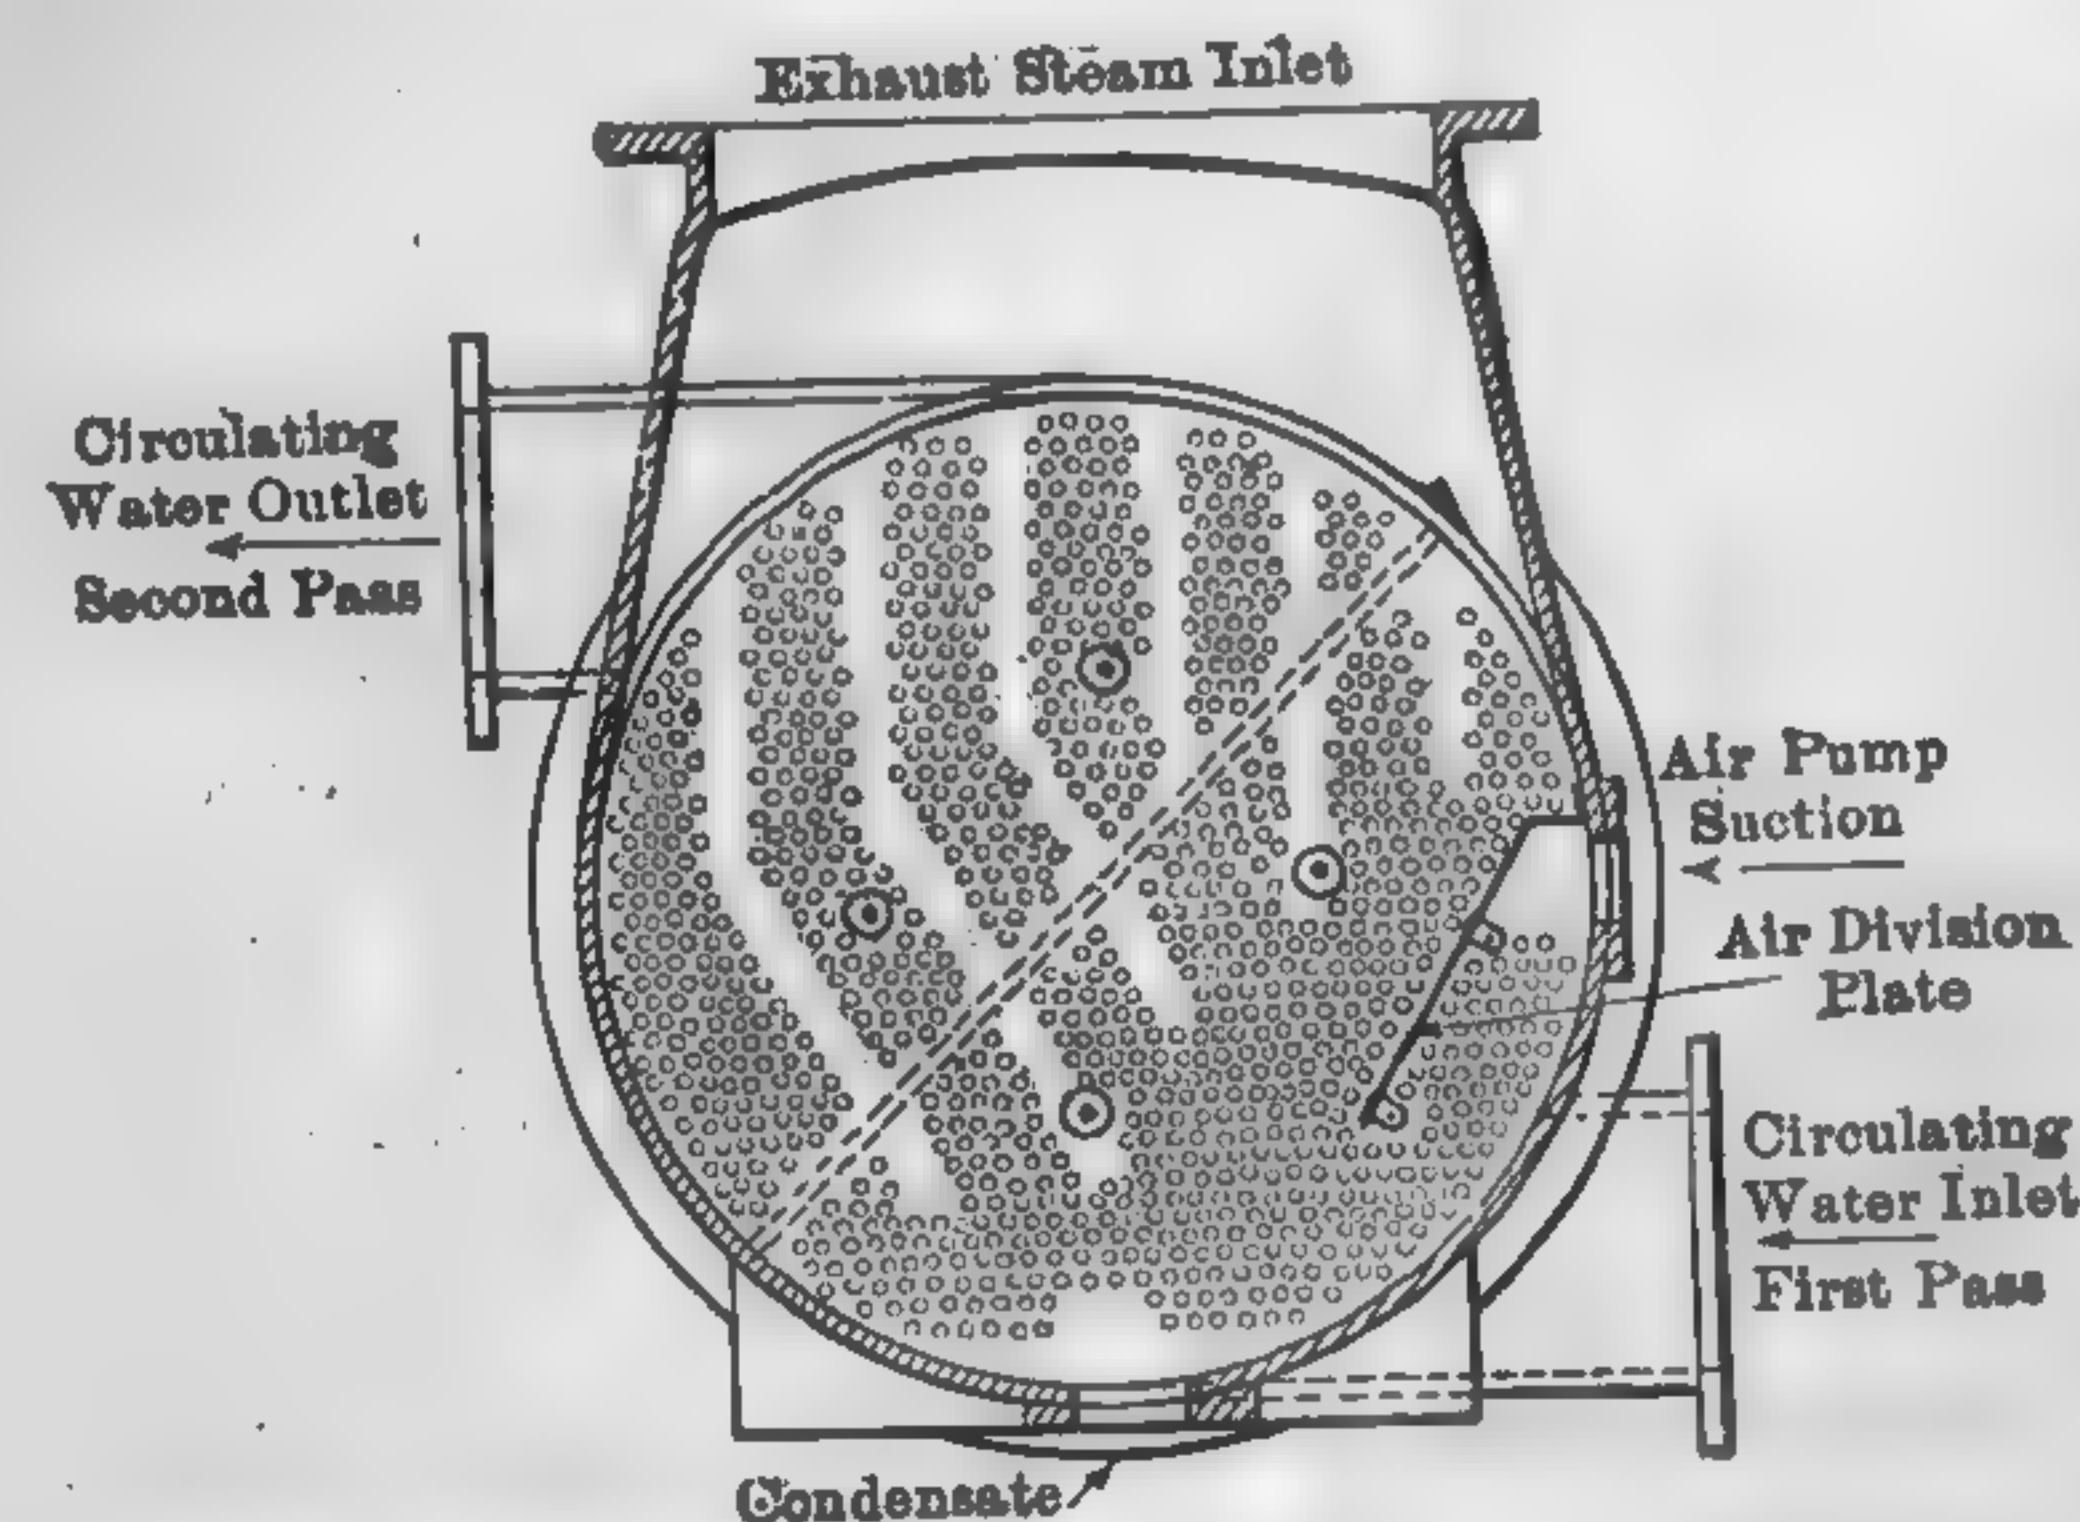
Tube Layout — Alberger "Spiroflo" Condenser.
